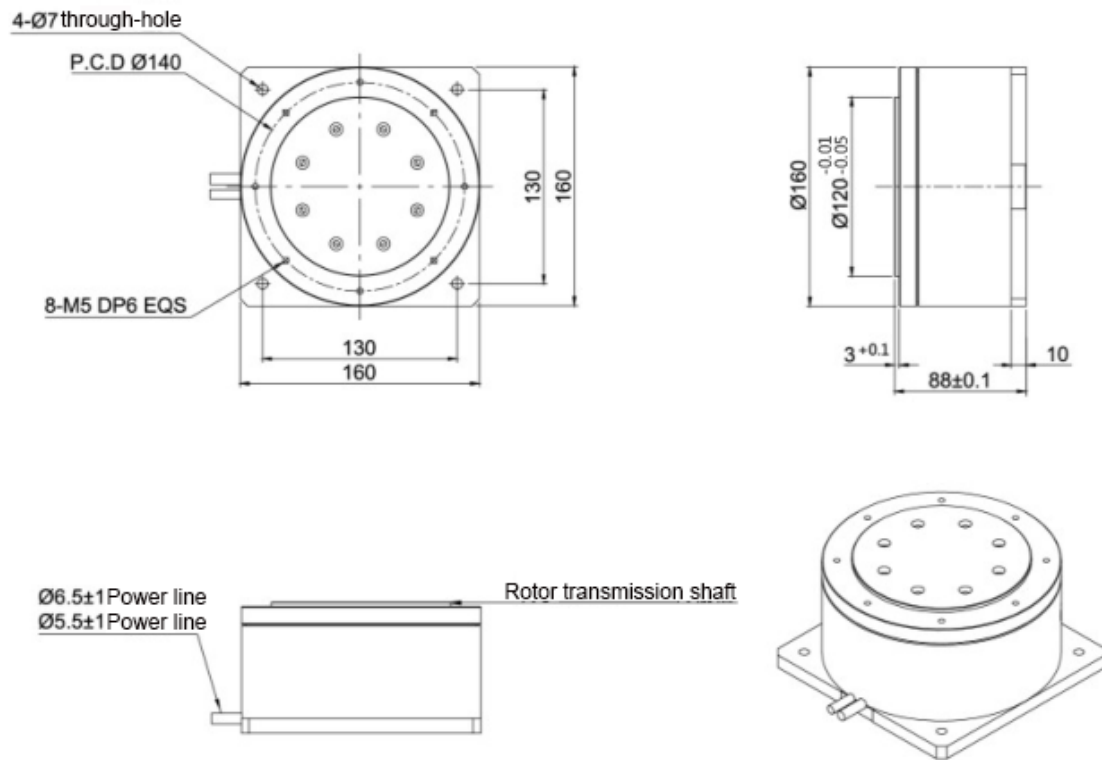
Outline dimensional drawing of WZCR-D160S-88 motor
